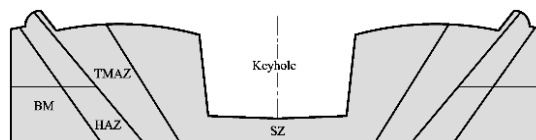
Schematic of different regions in friction stir spot welding method [11]
